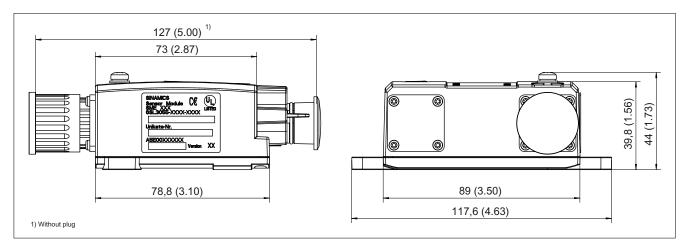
Dimension drawing of Sensor Module External SME125, all data in mm and (inches) order number 6SL3055-0AA00-5KA0
